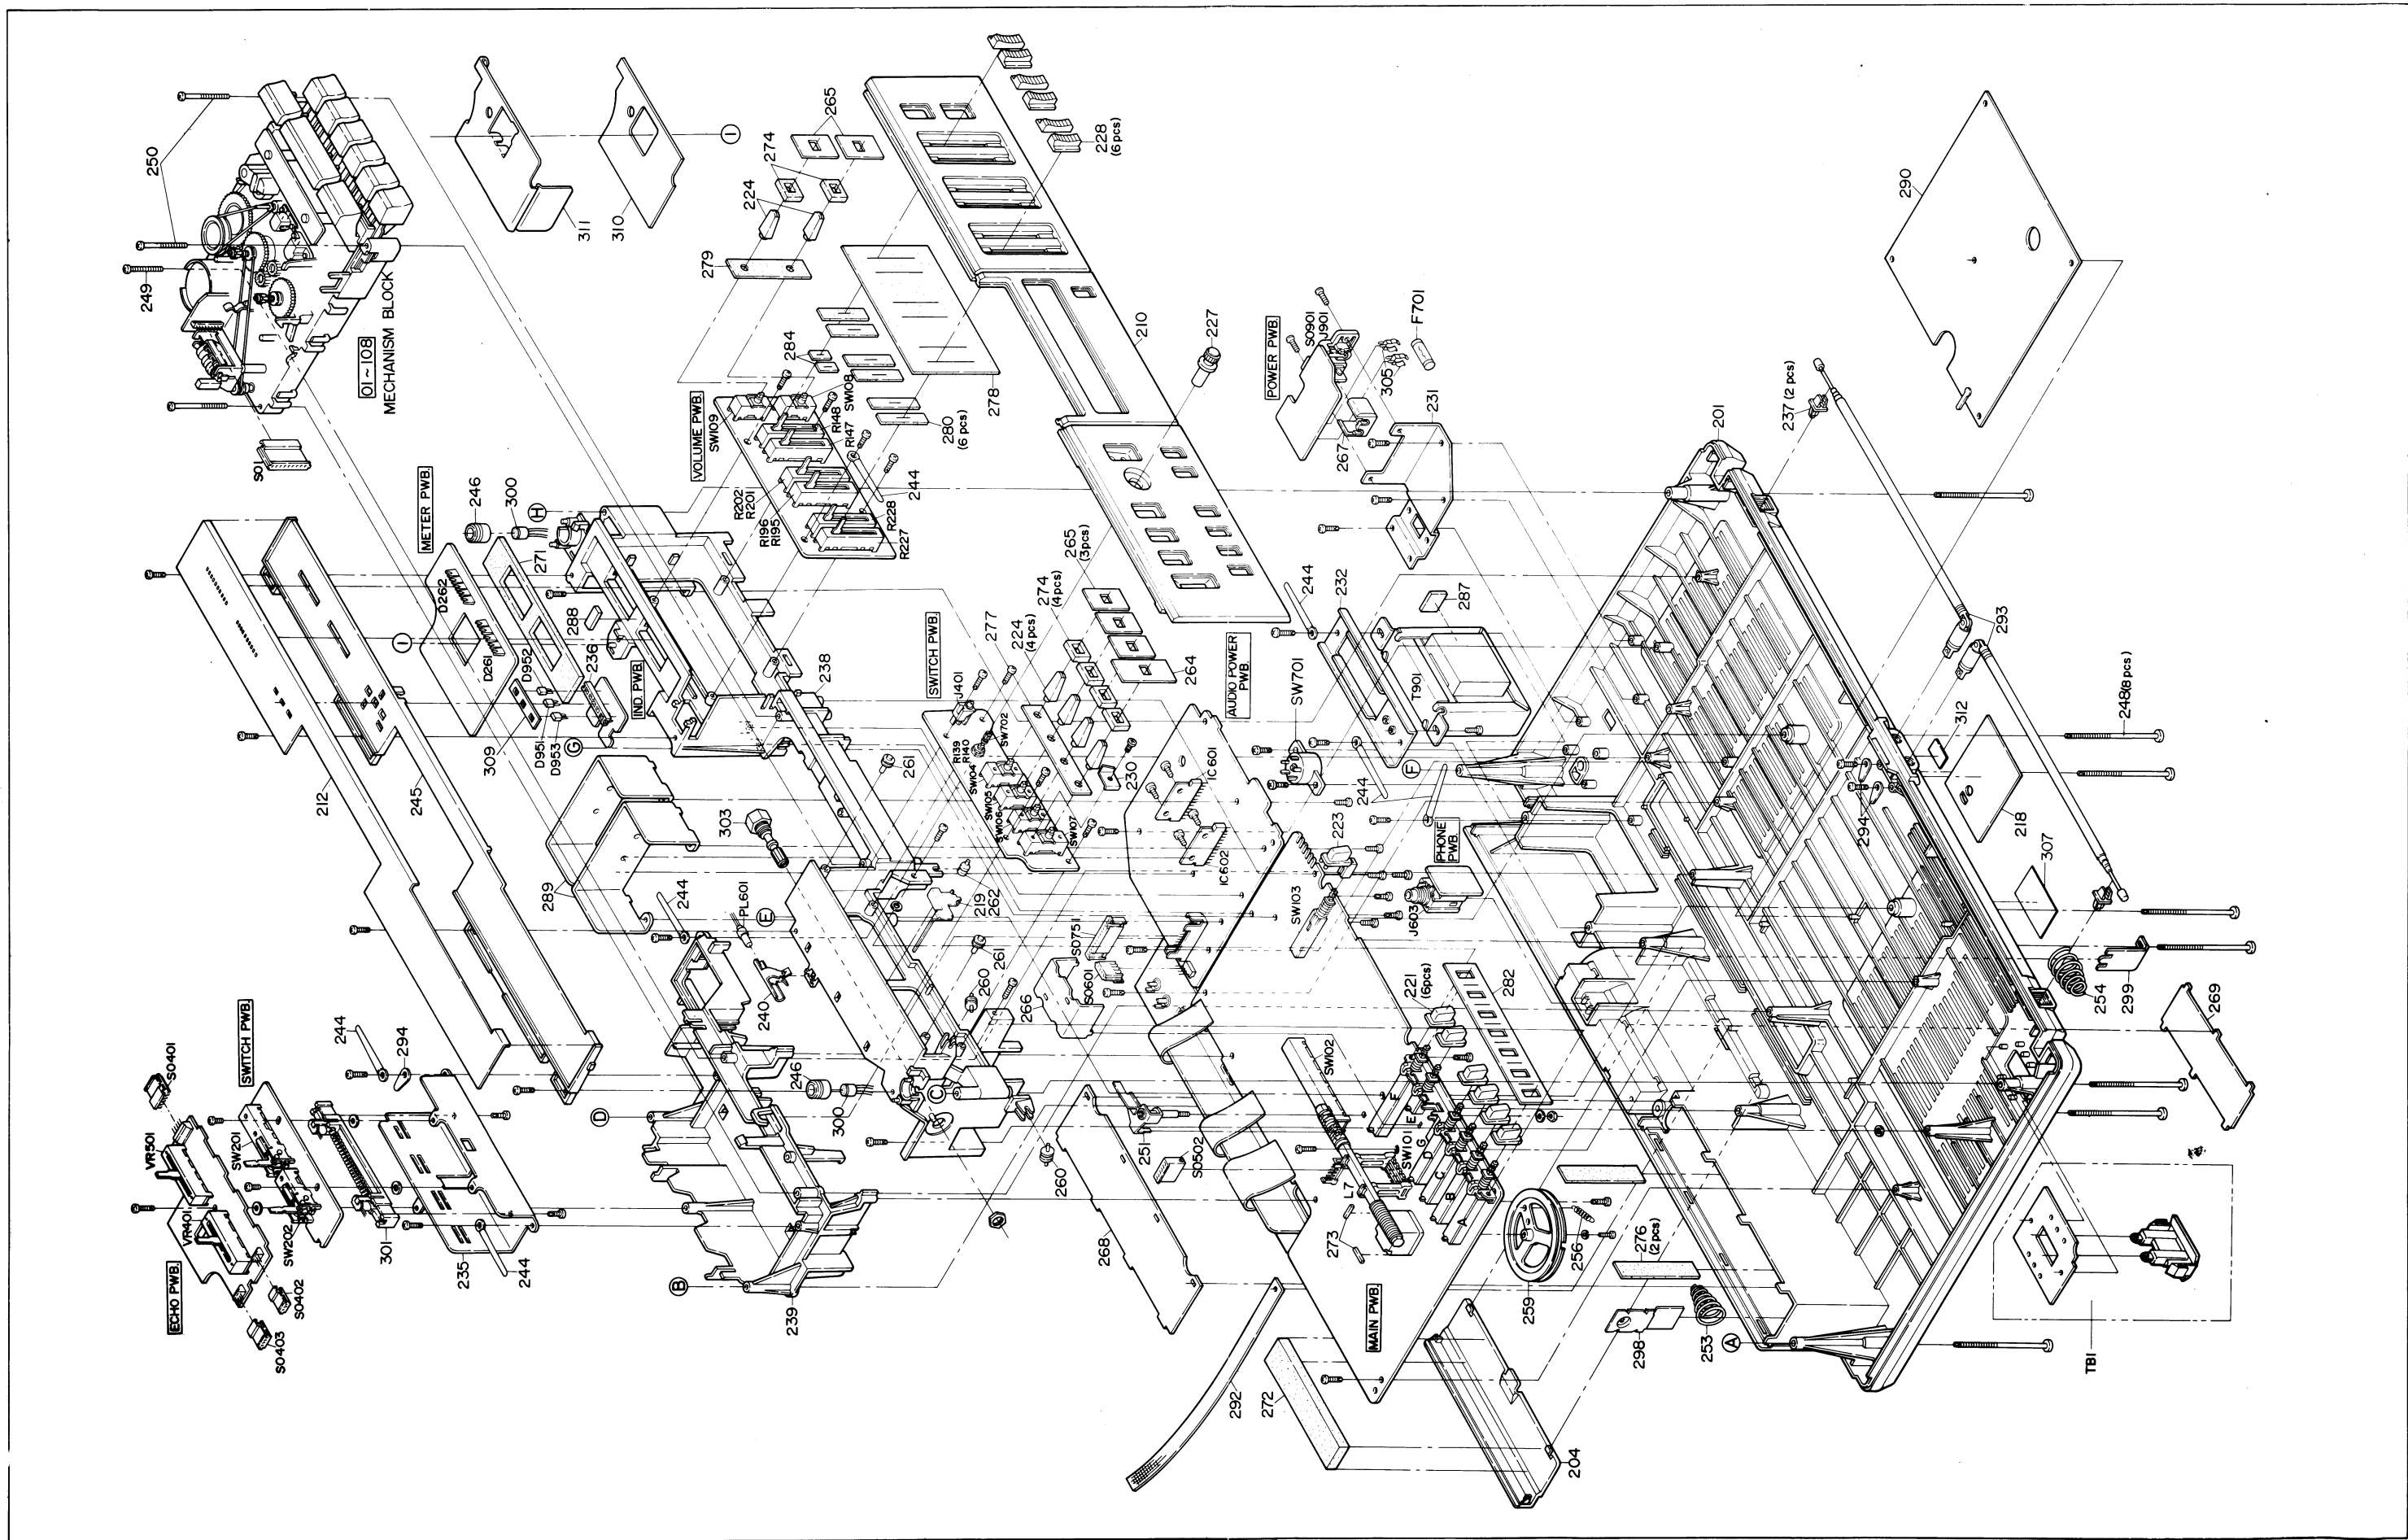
CABINET EXPLODED VIEW (BACK CABINET)
